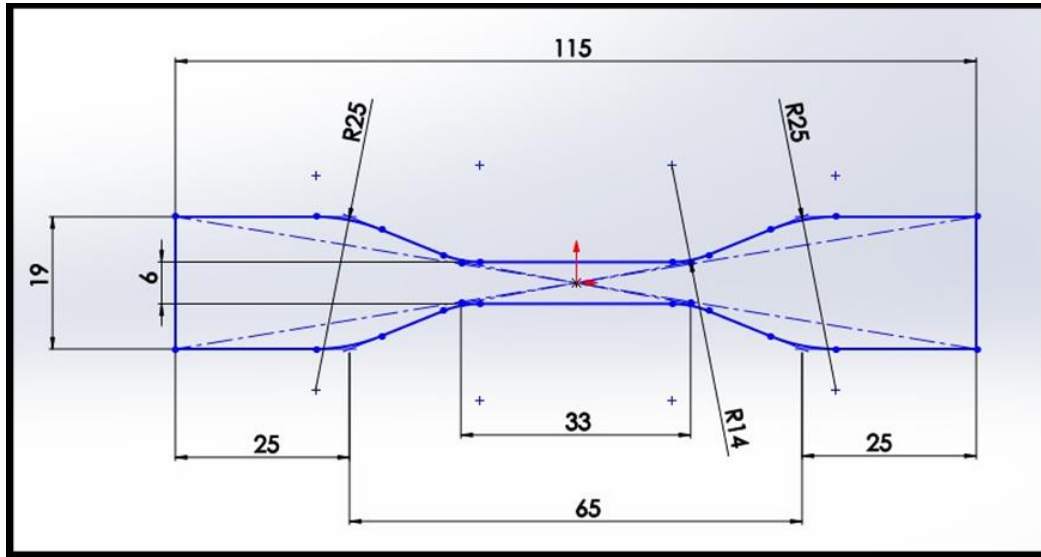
Geometry and dimension of ASTM D638 Type IV specimen test [19]
